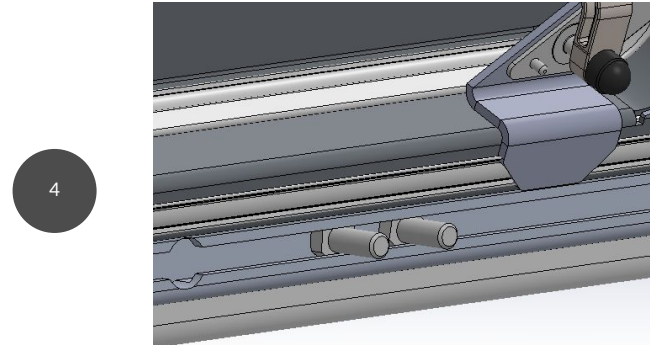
M8x20 Bolts in the Canopy's Bottom Nut Slot Rails
